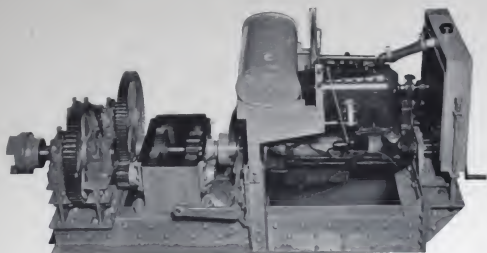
SPUR GEAR UNIT WITH ADDED GEARS
